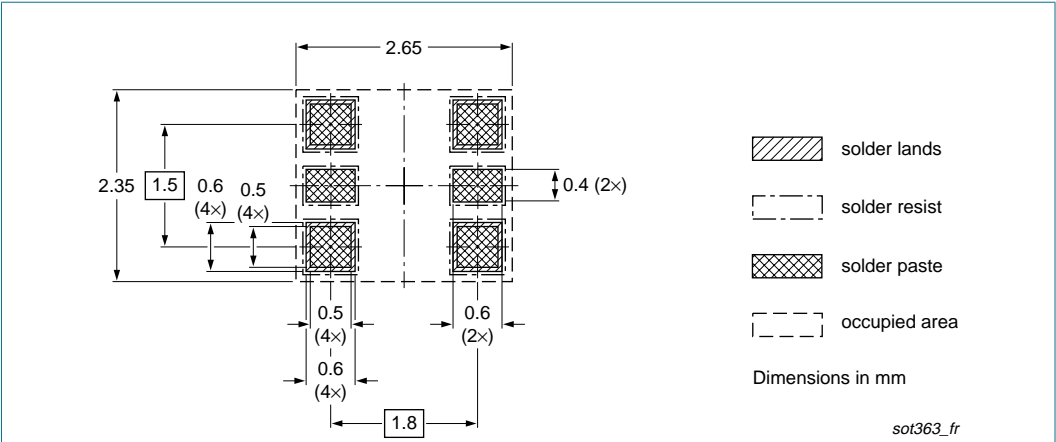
Reflow soldering footprint BAV99S (SOT363/SC-88)
